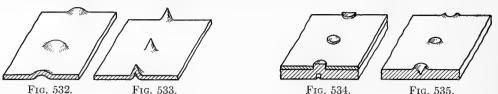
Round, embossed projections allow the use of flat electrodes. Several projection welds can be made simultaneously.
